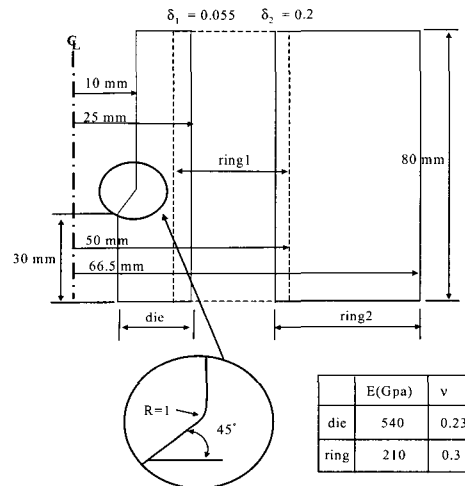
Geometrical dimensions of the extrusion die set with die and multi-stress ring
